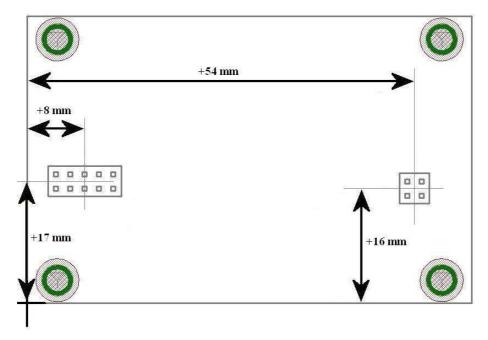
Medio P232: Mechanical Dimensions (Top View of the reader)
